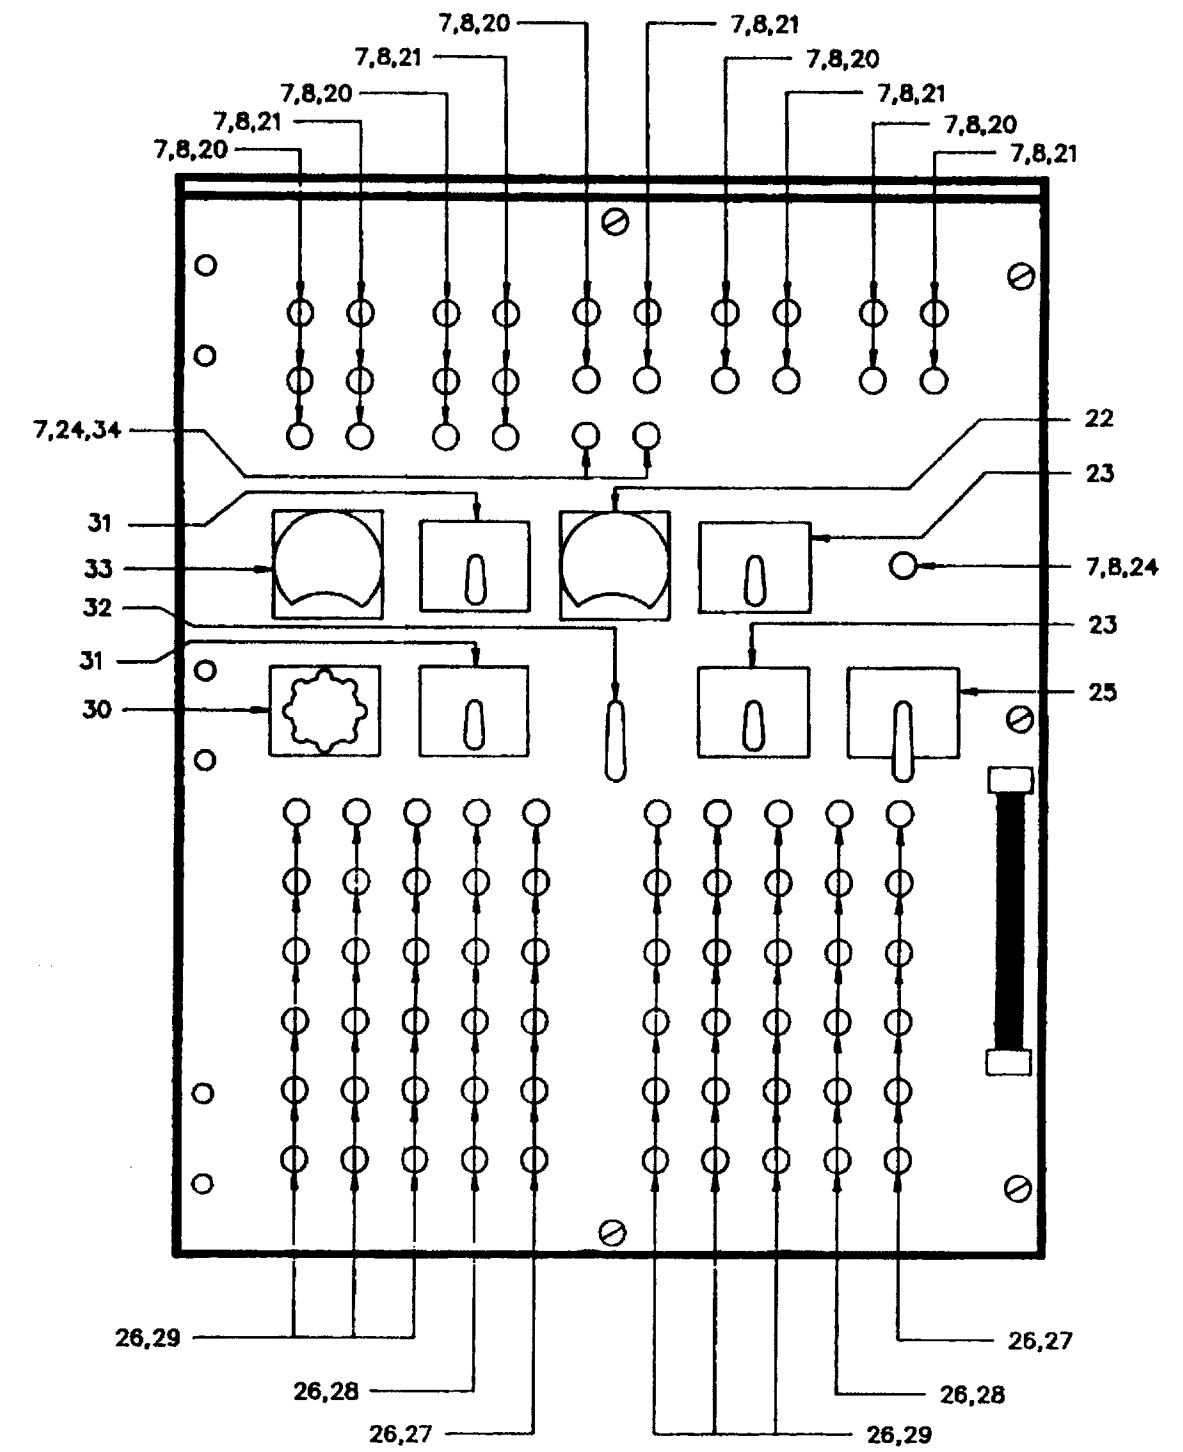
2SA Switchboard Assembly (Sheet 1 of 4)
